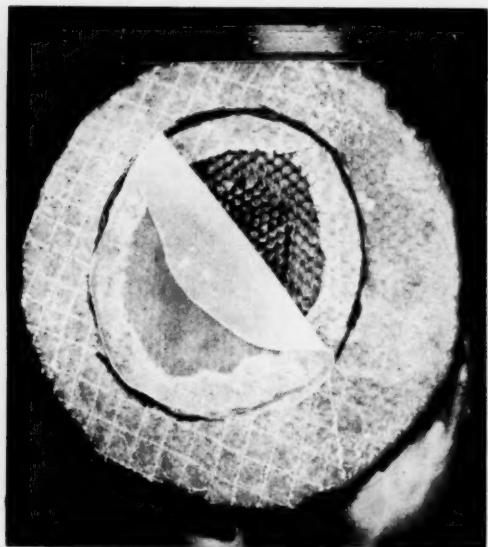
First layer of outer skin patch being placed in position over honeycomb. Fig. 3 shows how successive layers are built up
